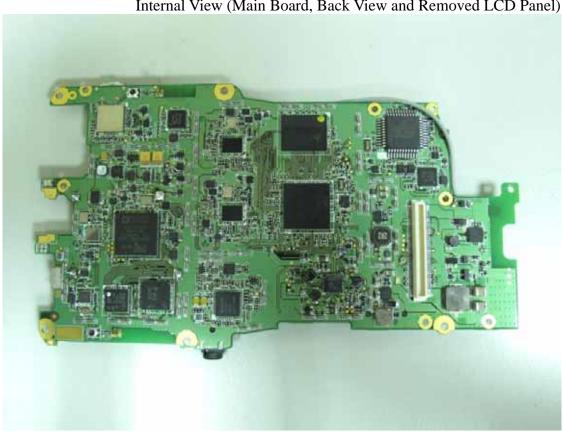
Internal View (Main Board, Back View and Removed LCD Panel)
